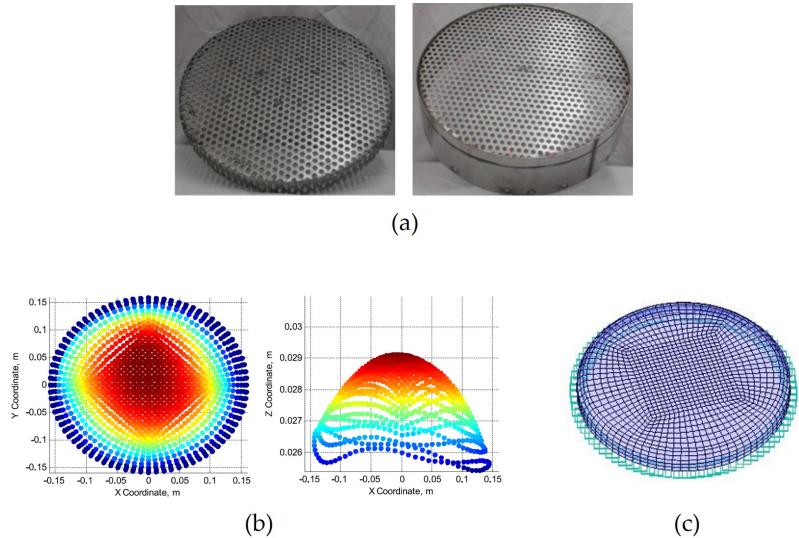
The benchmark exhaust cover plate. (a) A perforated plate before being welded to the test configuration (left) and after welding to the supporting cylinder (right), (b) measured surface geometry, and (c) meshed plate FEM model based on the measured geometry. Figures adapted from [17] with permission.
